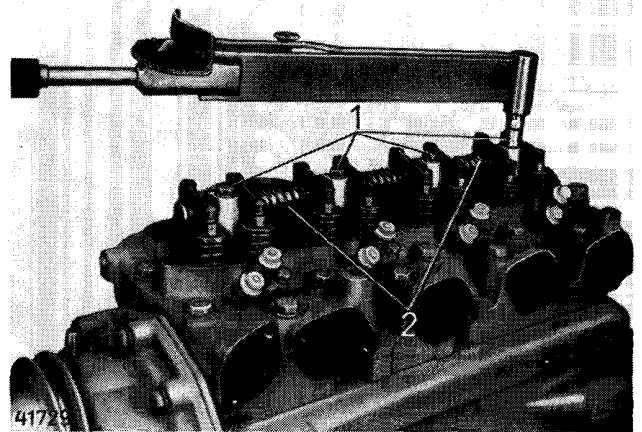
Tightening Rocker Arm Shaft Assembly
